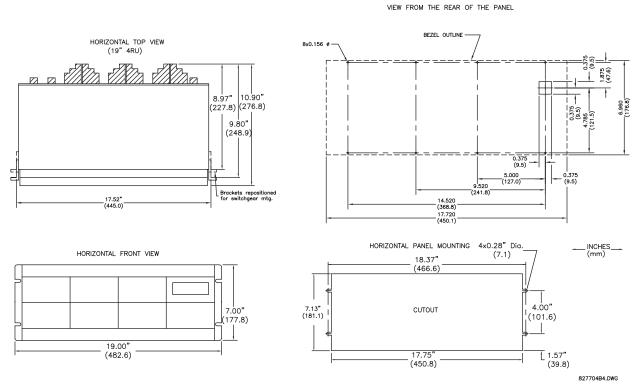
C60 HORIZONTAL MOUNTING AND DIMENSIONS
